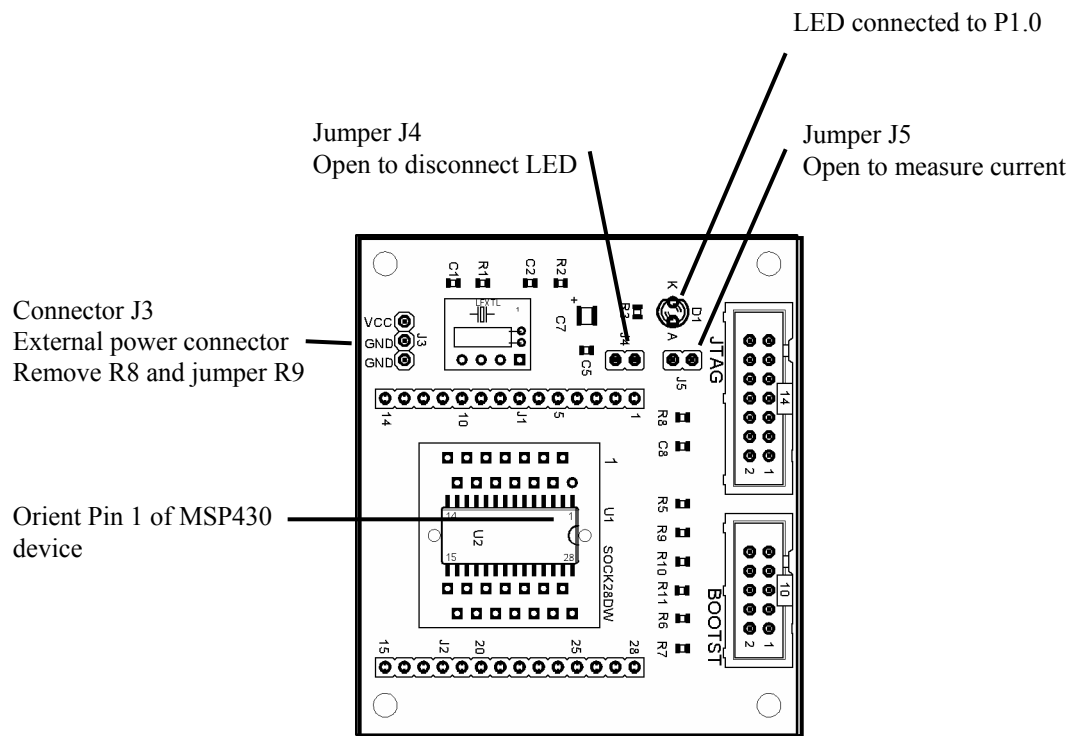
MSP-TS430DW28 Target Socket module, PCB Pictorials
